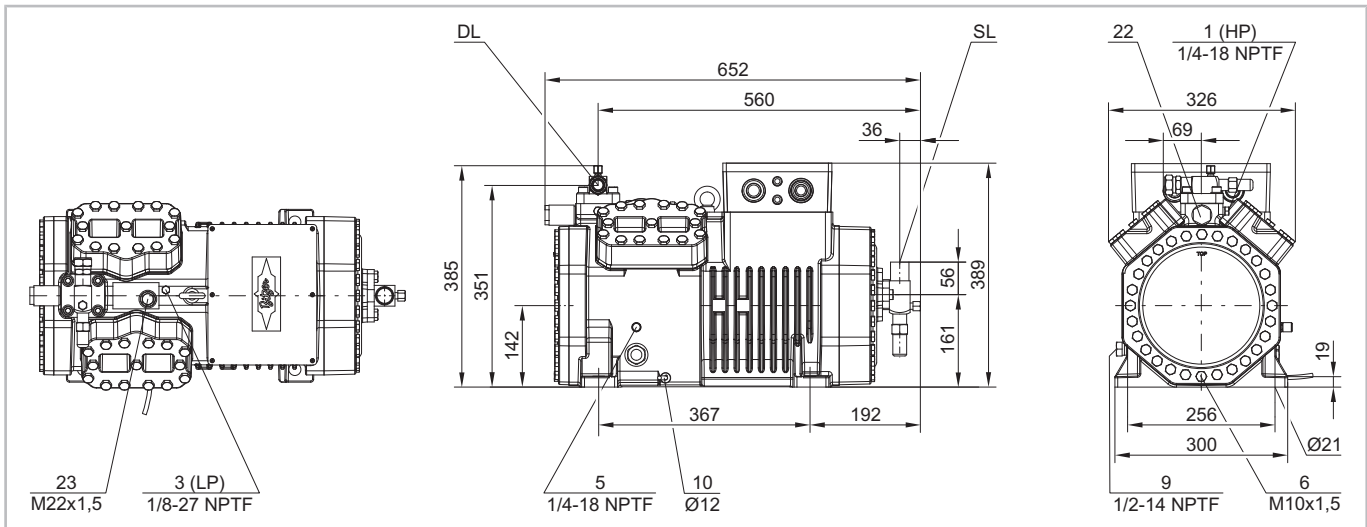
Dimensional drawing 4JTC-10(L)K .. 4FTC-20(L)K
